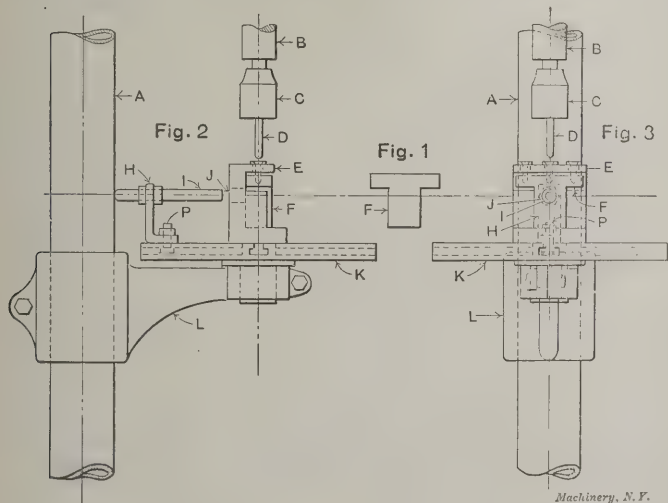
Forging to be Drilled. Figs. 2 and 3, Front and Side of Drill Press with Knock-out Attached.
